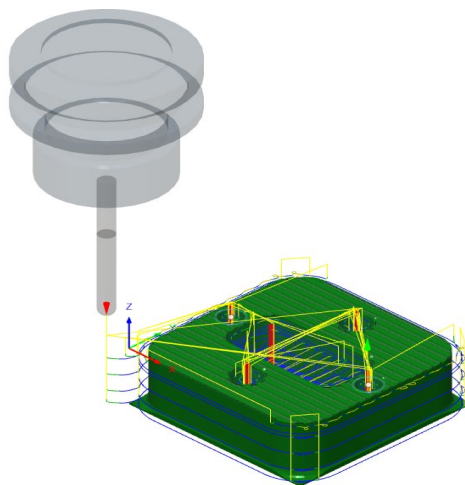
Adaptive Clearing 1/4" Ball End Mill
